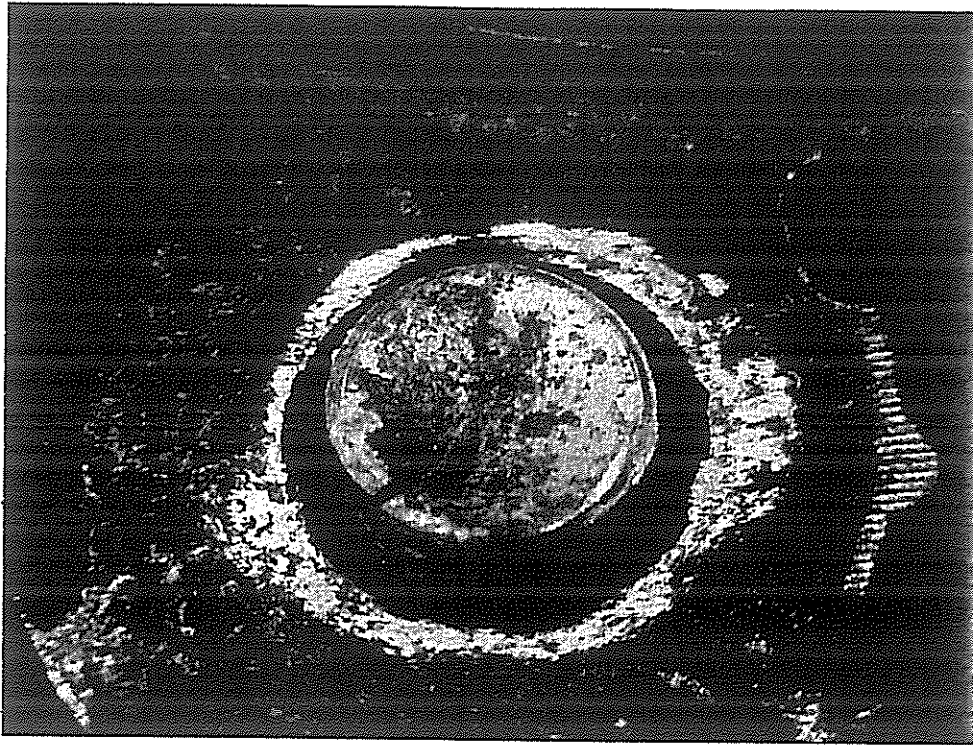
Showing the location of fracture on bolt 8 at the thread runout – edges of the bolt and fracture were damaged by looseness of the wheel
